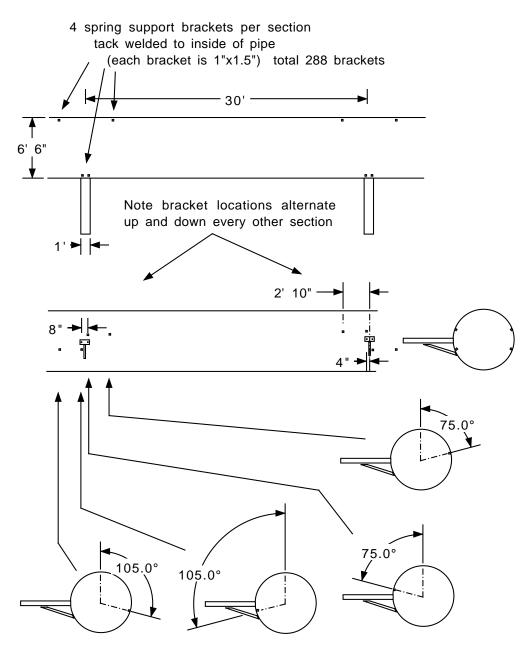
Locations for welding spring brackets inside decay pipe.
